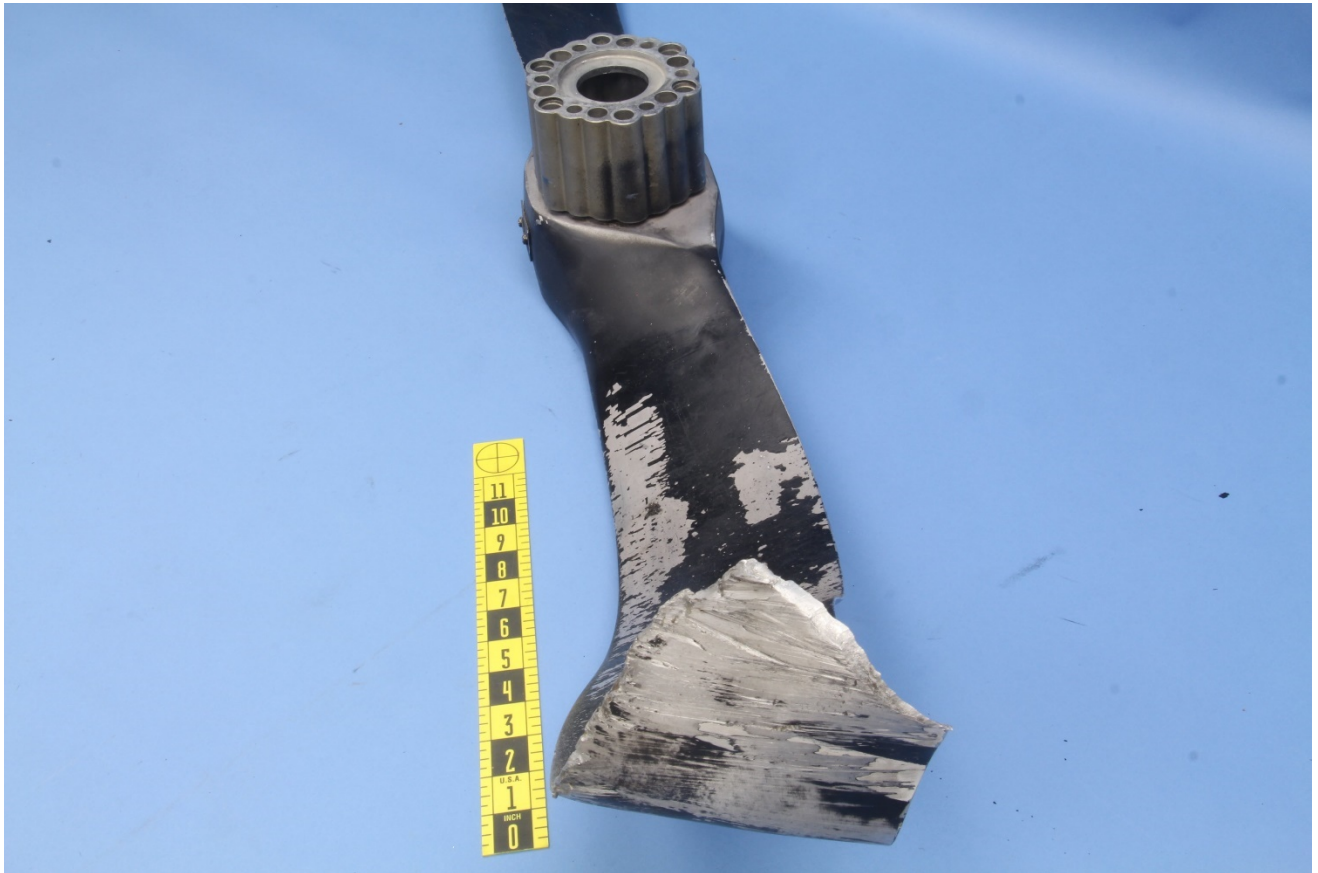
View of the bent and fractured tip of the intact blade side, as received.
